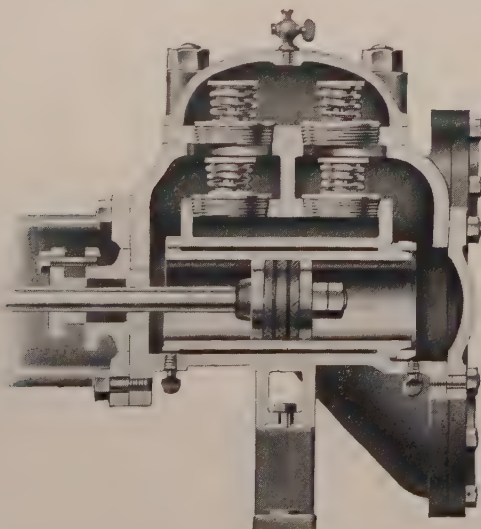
Worthington Valve-plate Type Liquid End—submerged piston pattern. Removable cylinder liners.
